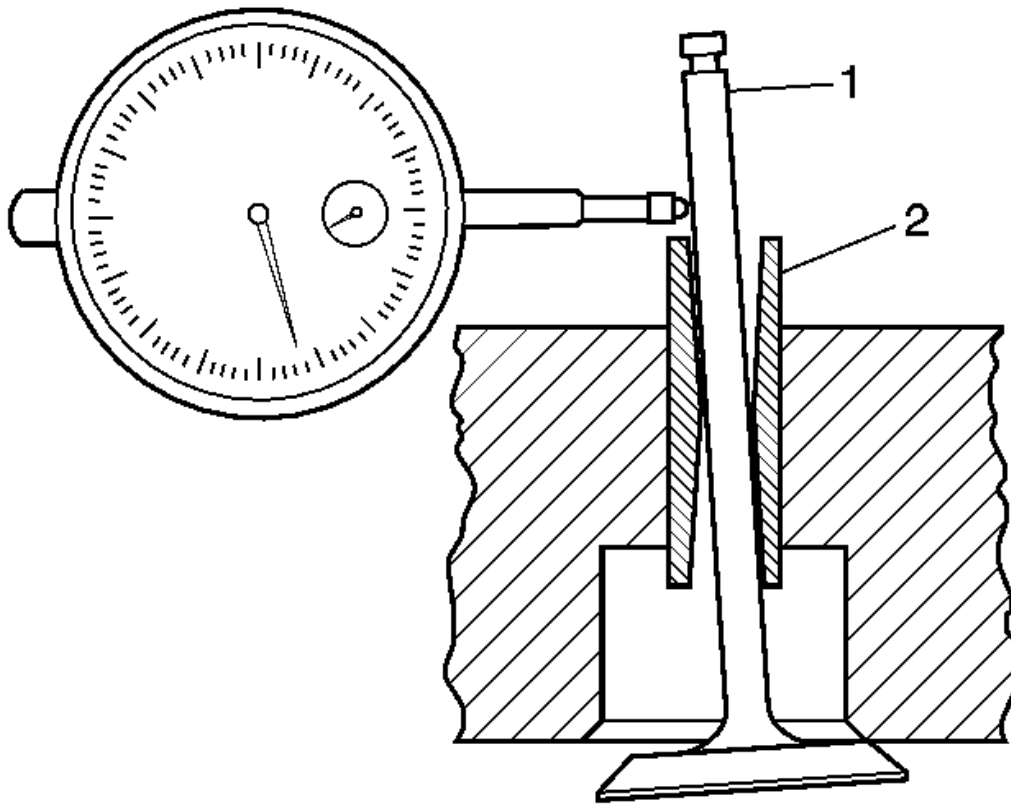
Inspecting For Excessive Valve Stem To Guide Clearance
